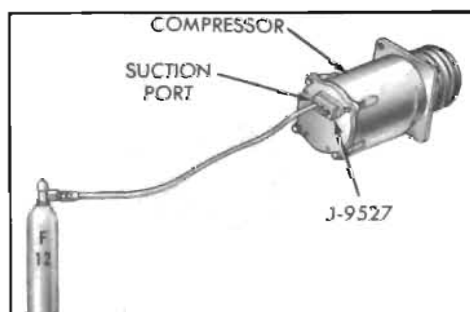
Leak Testing Shaft Seal and Seal Seat O-Ring
